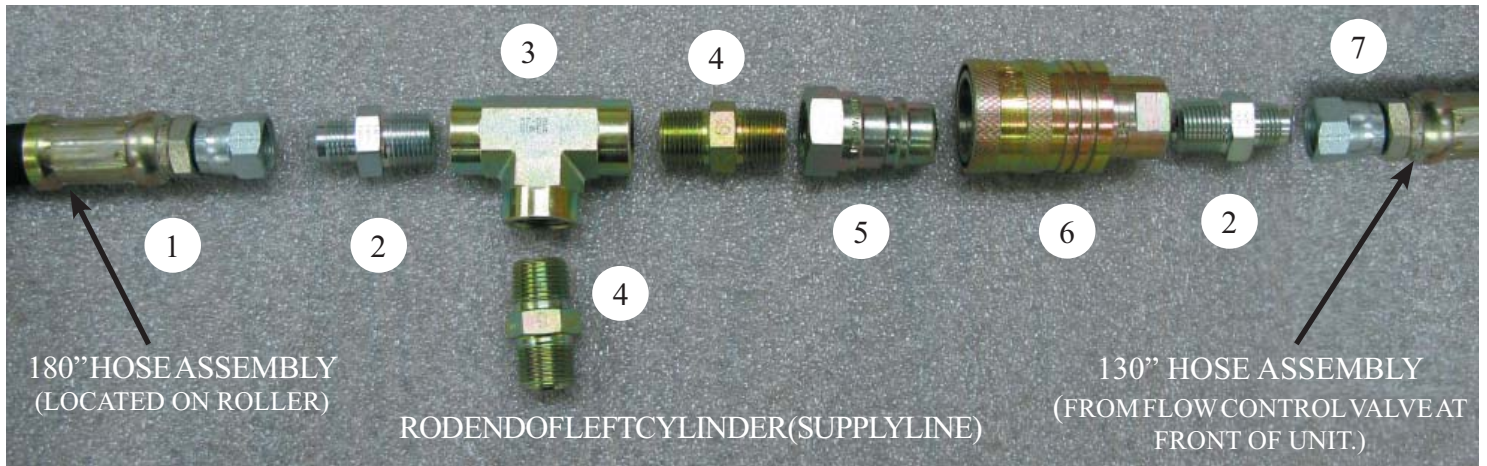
Rod End Assembly of LEFT Cylinder
